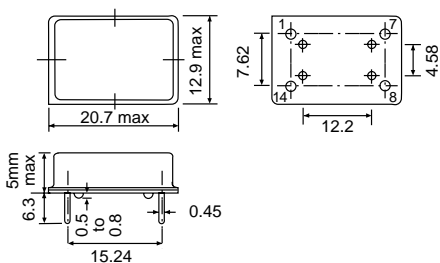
ECS-1000 Series – Top, Bottom and Side views
